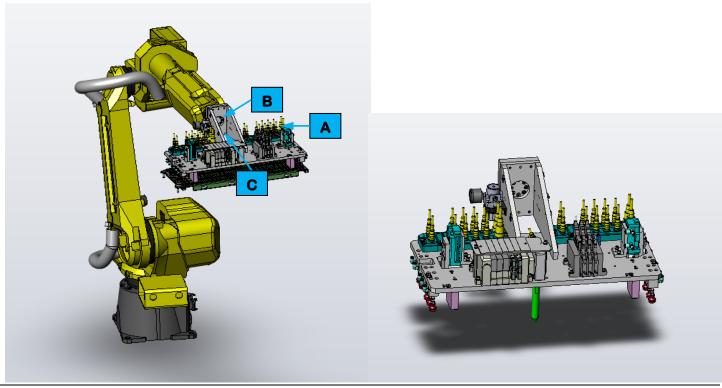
An illustration of the Dispense Robot end of arm tooling.
